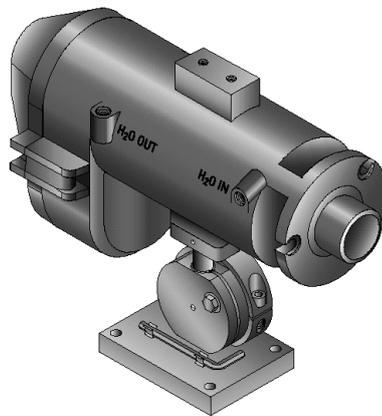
ThermoJacket (XXXTXJT4) with Mounting Base
